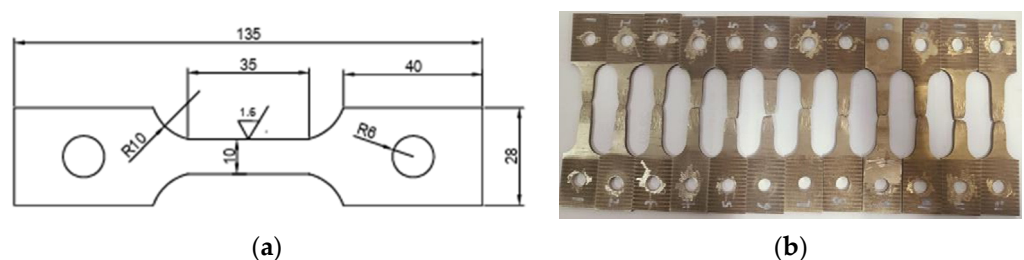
High-temperature quasi-static tensile specimen. (a) The size of the specimen (unit: mm); (b) Fracture effect of the specimen.
